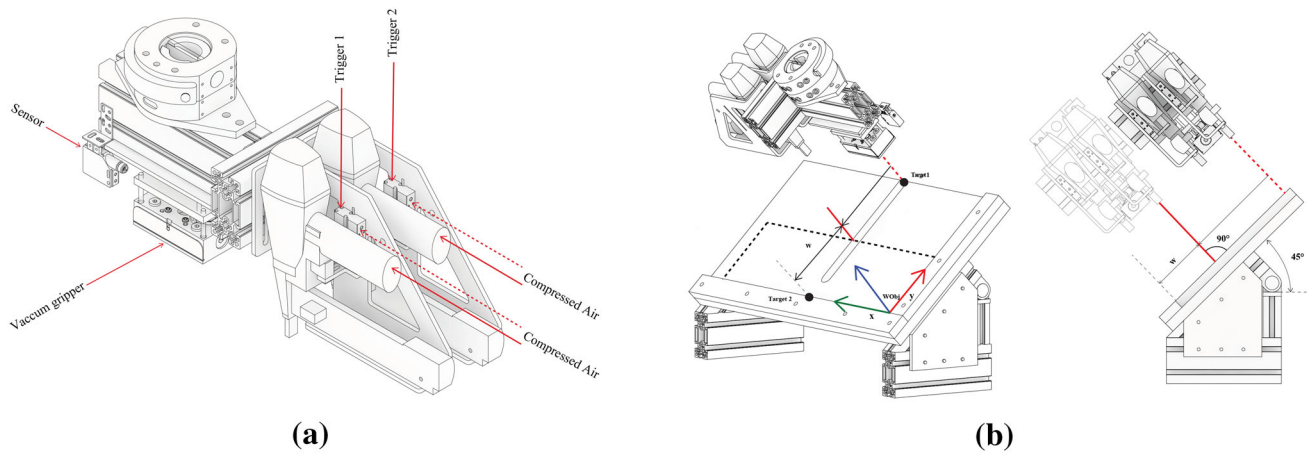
a Shingle tool is equipped with a light-reflex sensor, a vacuum gripper fixated with additional springs and a soft gripping form of the shingle, and two standard nailguns. b Feeding table used
